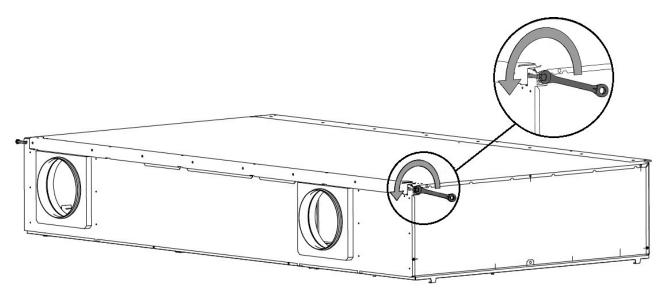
Disassemble the rear bracket, right-hand side seen from behind
